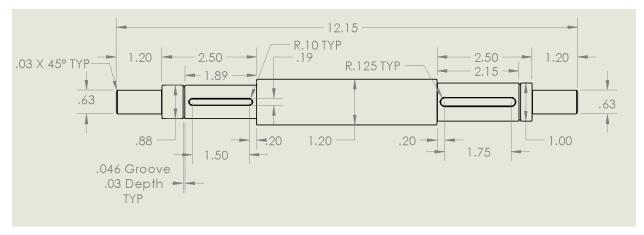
Intermediate Shaft, Shaft Two Engineering Drawing in Inches
